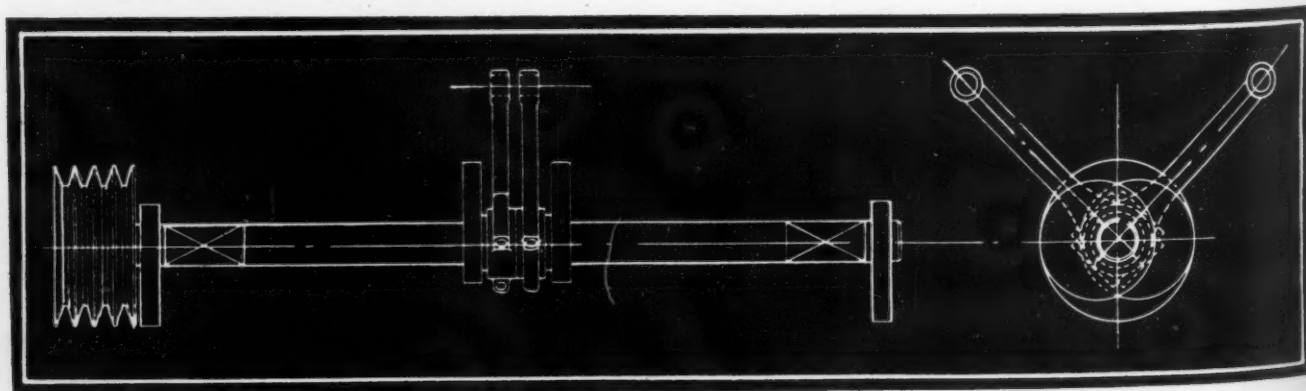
Above—Bonding and fatigue test for full lined bearings. Four rollers deflect the bearing shell which is rotated at 2500 revolutions per minute. If no cracking or bond failure occurs in 15 hours the bearing is satisfactory
